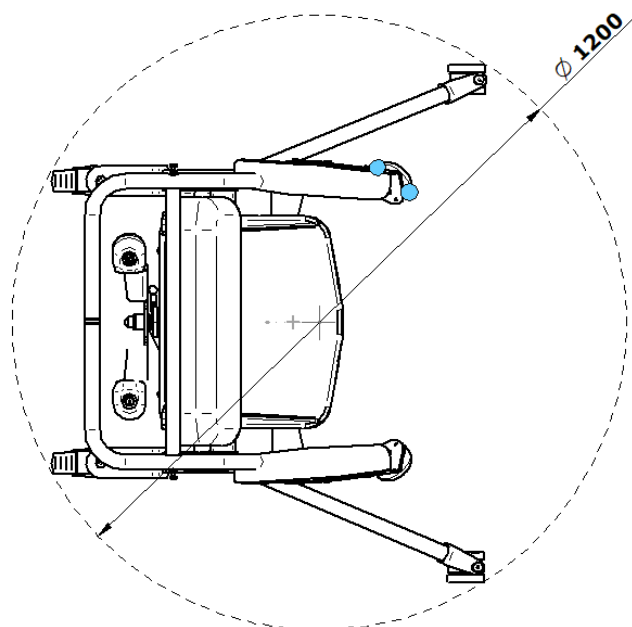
Turning diameter of Mobi Pro Flexi II (dimensions in mm)
